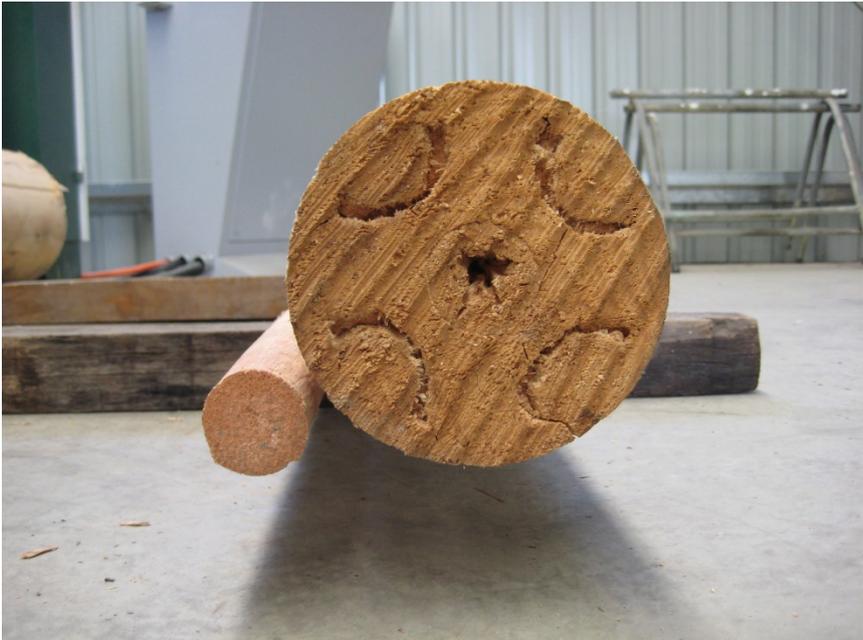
A 45 mm peeler core (left) produced from a spindleless veneer lathe compared with a 130 mm peeler core produced from a standard, commercial spindled lathe.
